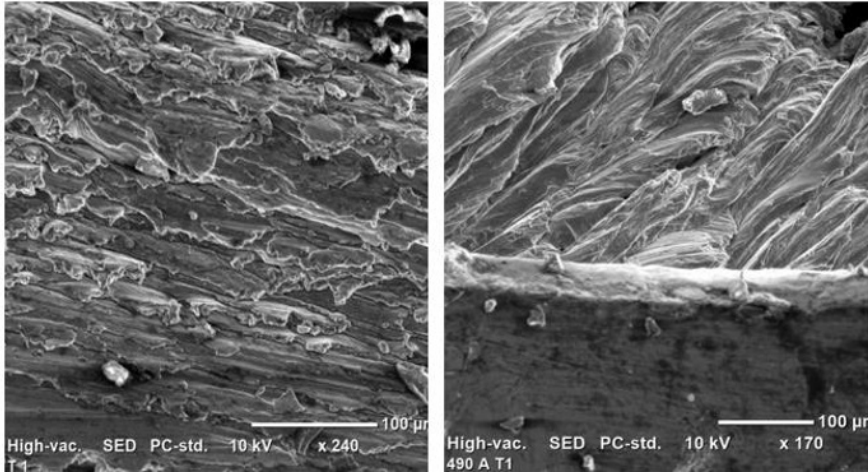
and 6. SEM fractographs tensile specimens in Sample 1c and 1d
